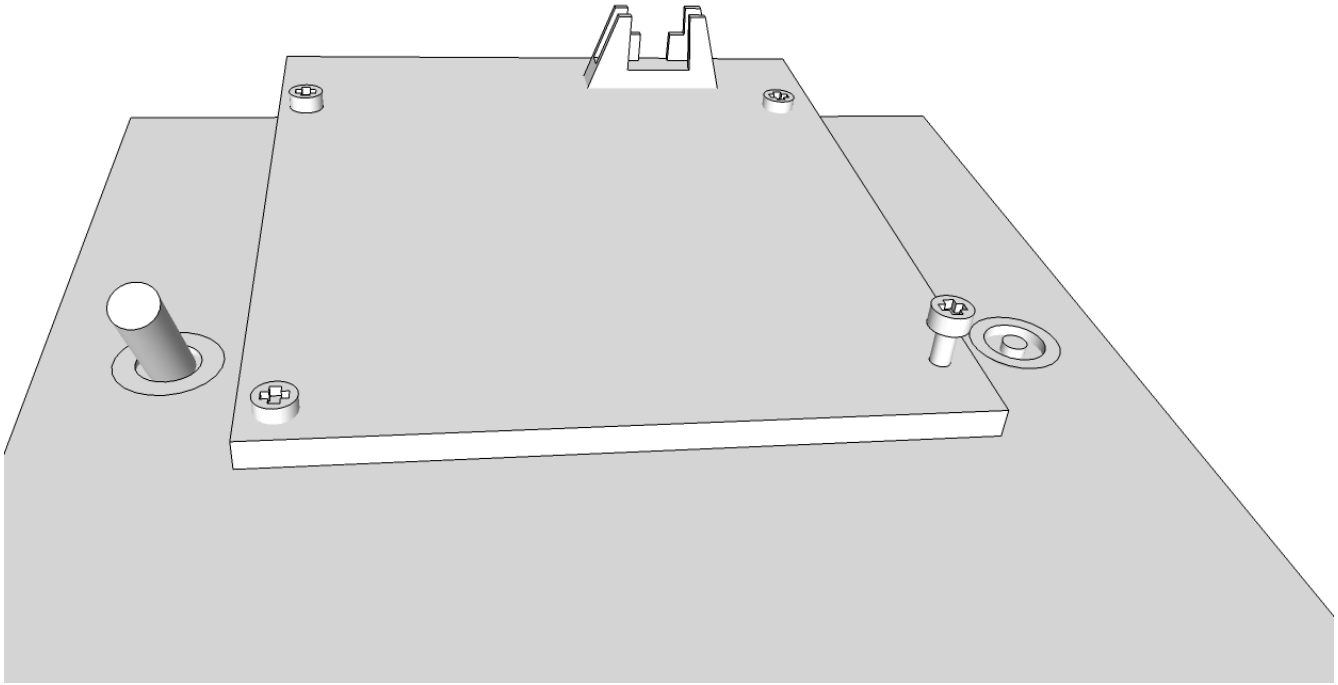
Attaching the PCB Brainboard to the Upper Chassis.
